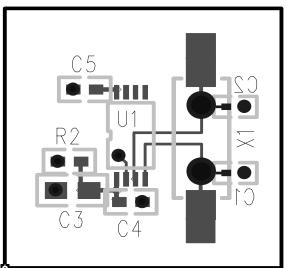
B. ICS843011 PC BOARD LAYOUT EXAMPLE
